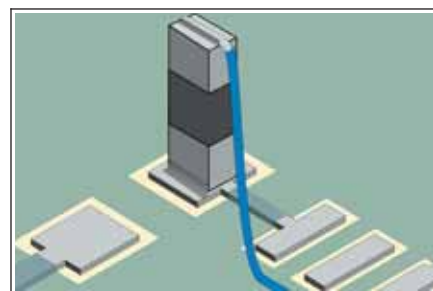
Acceptable Wire soldered to component end, lifted off pad.
